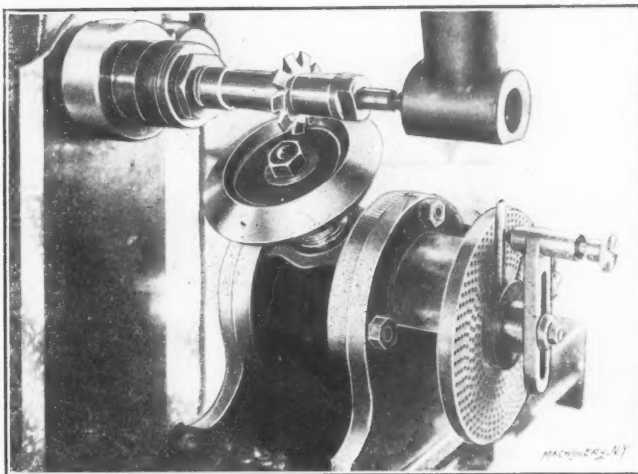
Work in Place on Machine, Ready for Trial Cut.
